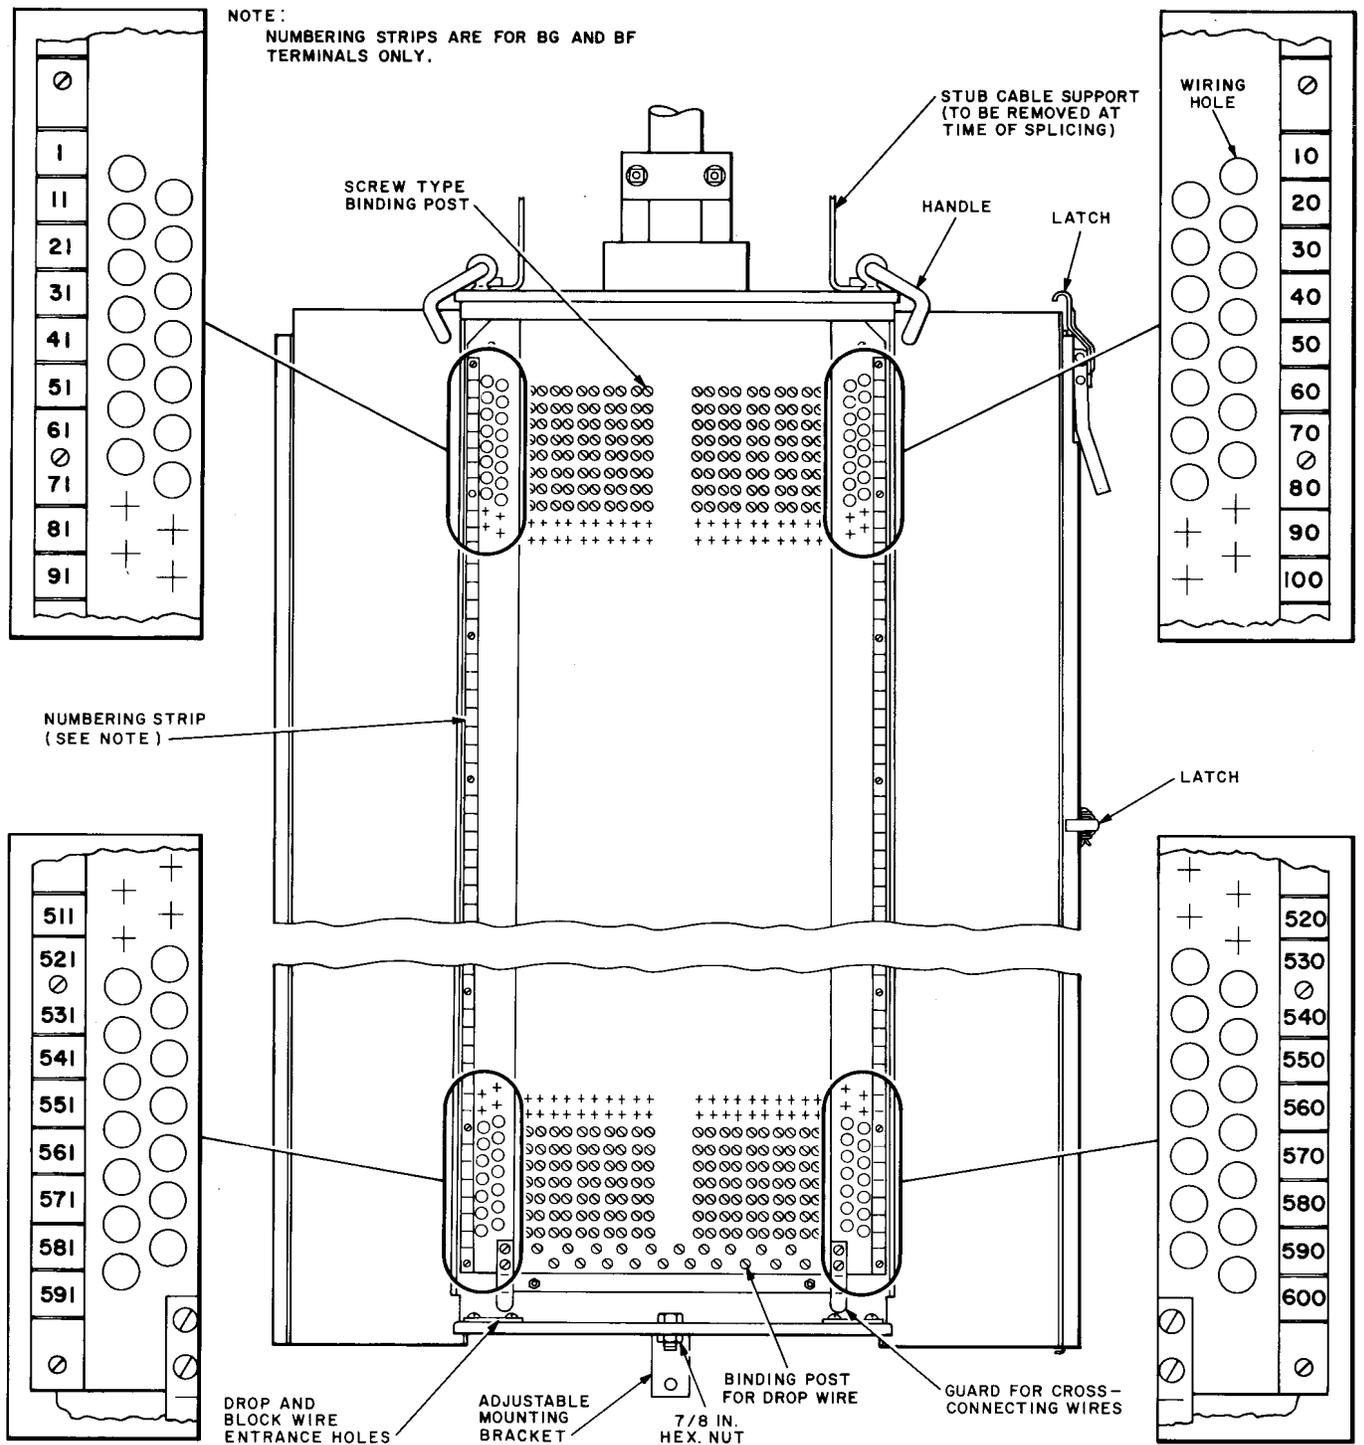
BF-600 Cross-Connecting Terminal (Front View)
